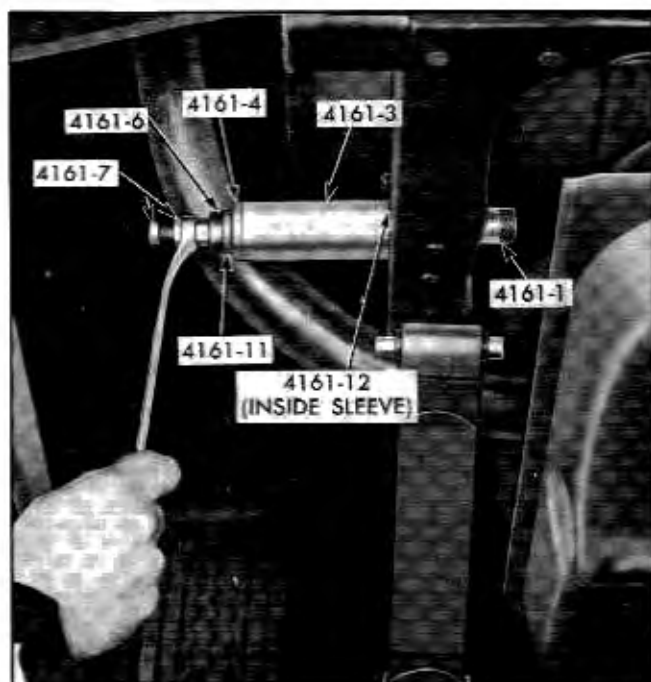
Bushing Replacer Tool J-4161-A Positioned for Removal of Rear Bushing
